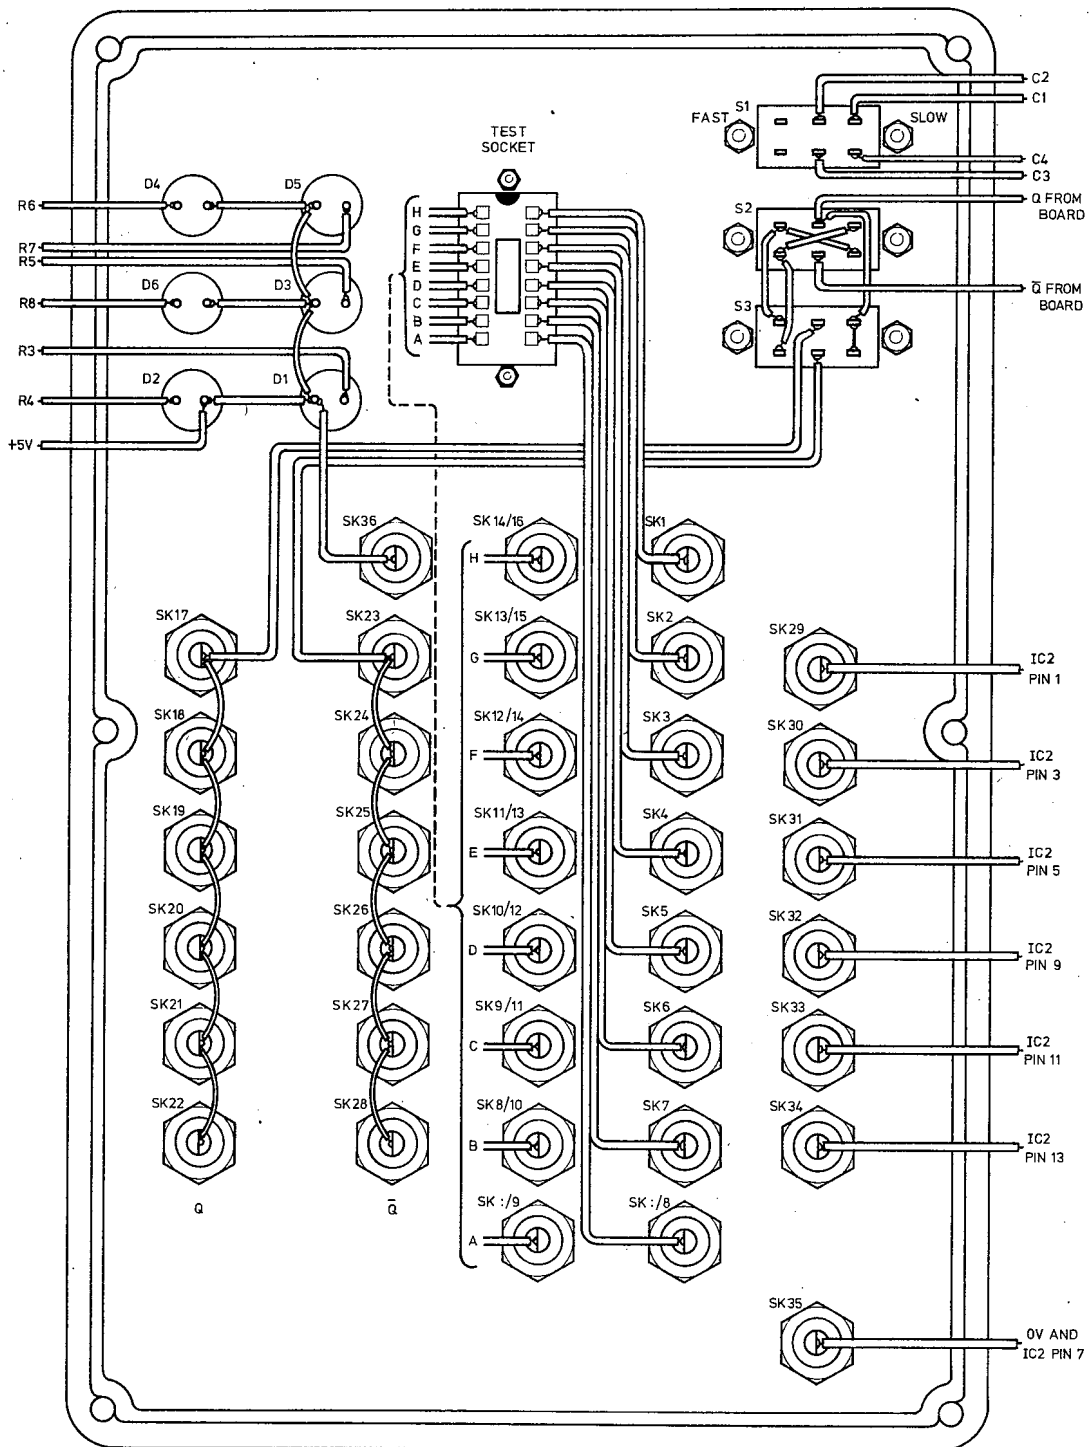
General layout and wiring of the front panel viewed from the rear showing both switch connections and the wiring of the i.c. test socket patch sockets SK1 to SK14/16
